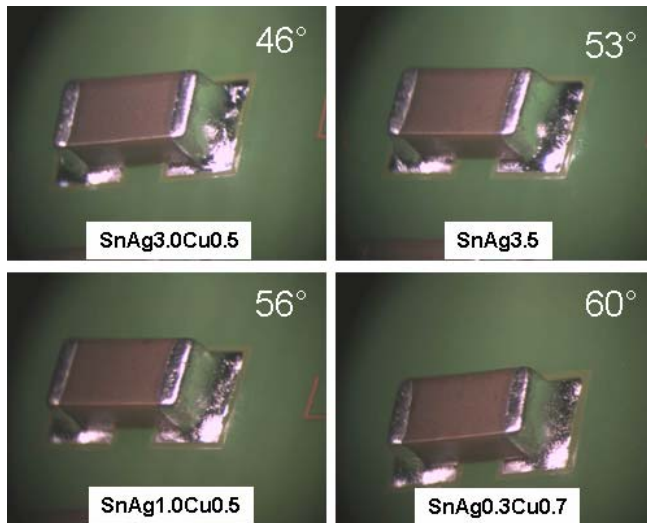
Optical inspection and measured angle of solder joints at chip capacitors 1206
